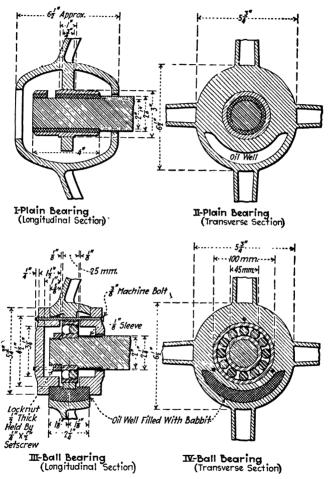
Details of a bearing housing of a 10-hp. motor before and after installation of ball bearings.
